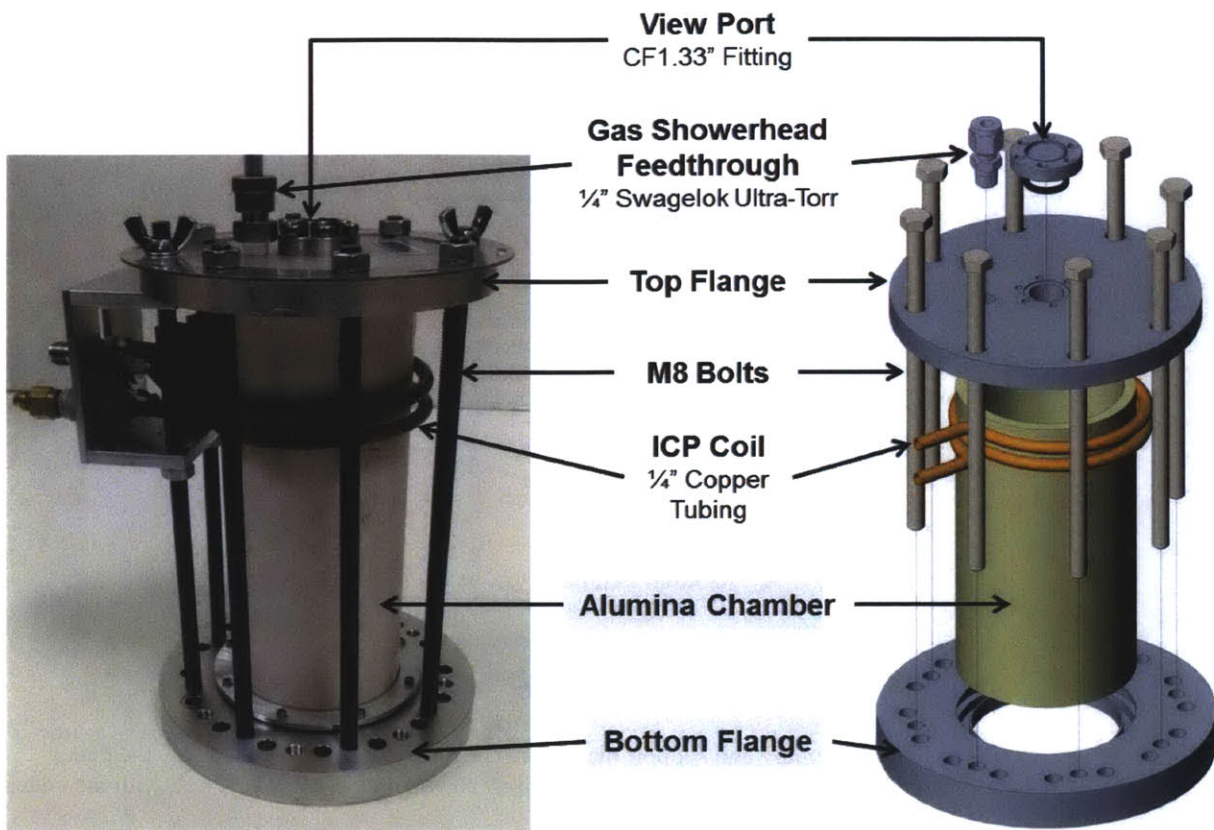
The upper chamber assembly. The entire assembly is 9" long and has an outermost diameter of 6.25". The lower chamber assembly (shown in Figure 3.7) has four parts. At the top sits a CF6"-CF4.5" zero-length reducer flange, which is connected through a 3" long cylinder to a CF4.5" flange with a 2" compression port welded on for the chuck assembly feedthrough. These three components are held together by 4" long 5/16"-24 bolts that compress aluminum CF gaskets against the knife edge found on each mating surface. The fourth part of the assembly is a KF-40 to 1.5" NPT fitting for the vacuum line. The NPT end of this fitting screws into a taper-threaded hole on the side of the 3" long cylinder. This lower chamber assembly rests on a raised platform that provides stability for the full chamber and also a gap for the chuck assembly to be retracted through the 2" compression port. The raised platform also contains threaded holes that allow screws or bolts to provide axial alignment to the assembly. When the upper and lower chamber assemblies are brought together, these same alignment screws protrude through the through holes in the topmost CF6" flange of the lower assembly and provide points of axial alignment
